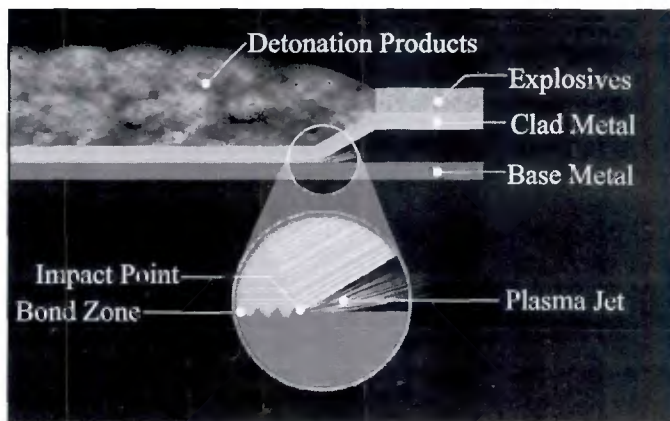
Schematic figure showing the basic features of the explosion welding process and the properties of the resulting weld.
